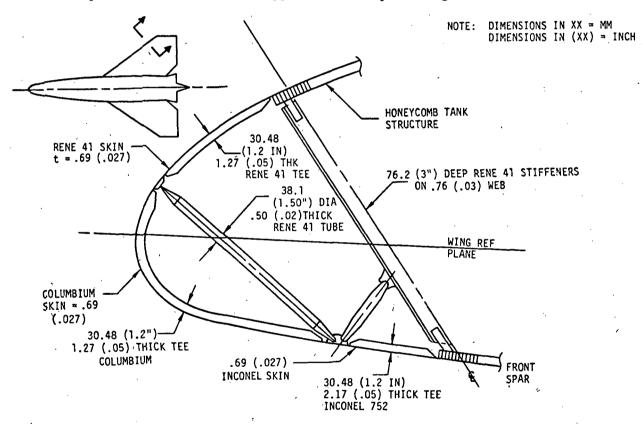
Typical SSTO Wing Leading Edge Structural Section
